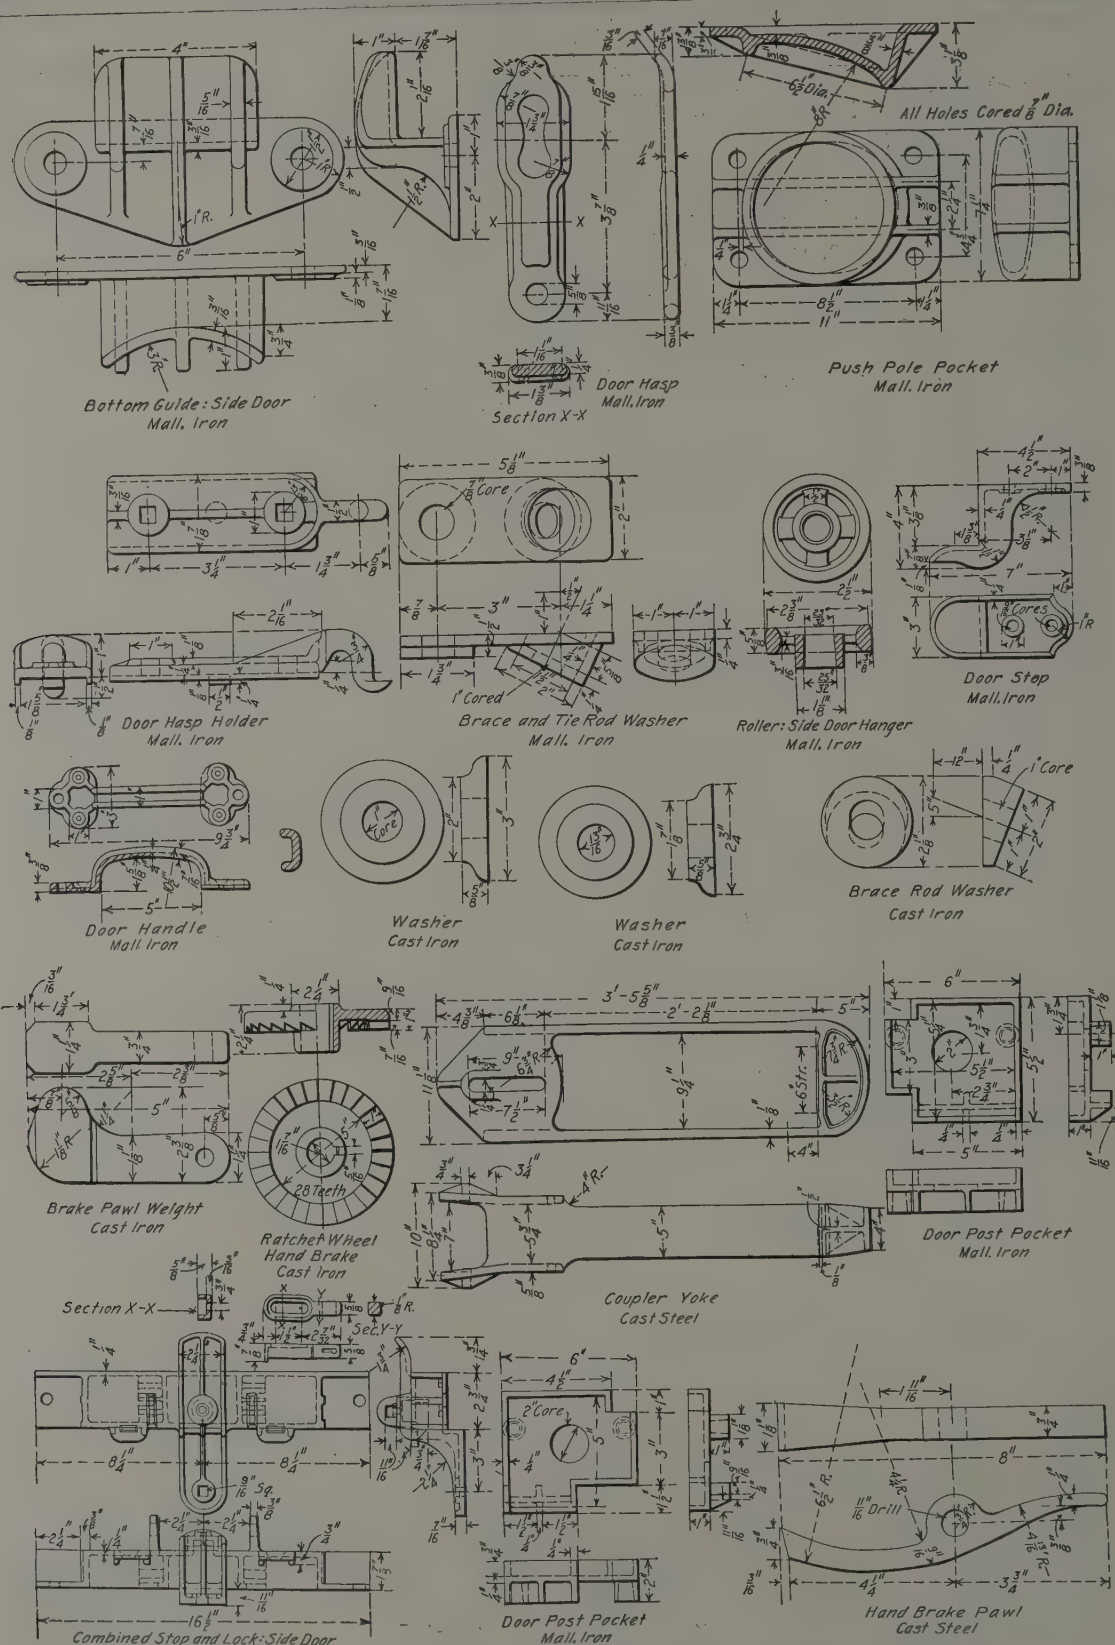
Details Used on New York Central Steel Underframe Box Car. Door Bottom Guide, Stop and Lock, Roller, etc. Furnished by the Camel Company.
